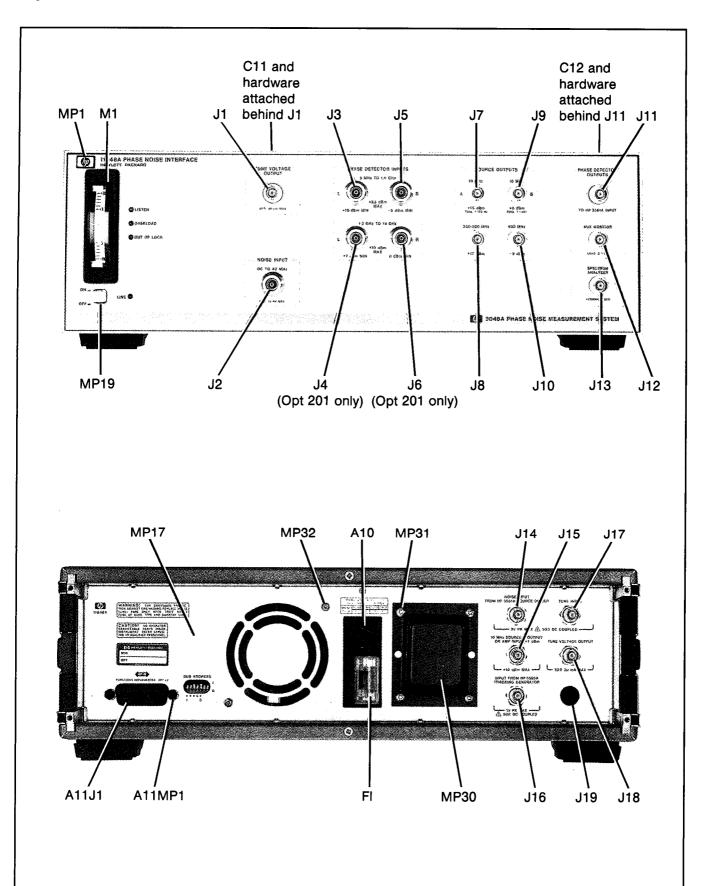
Parts Identification (Front Panel View and Rear Panel View)
